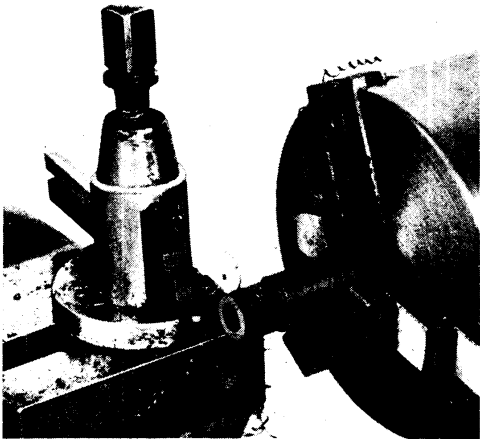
One method of cutting a screw thread on an ebonite component is illustrated. The work is done on a lathe
